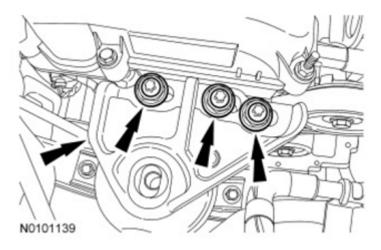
Locating Engine Mount Bracket Bolt Courtesy of FORD MOTOR CO.
